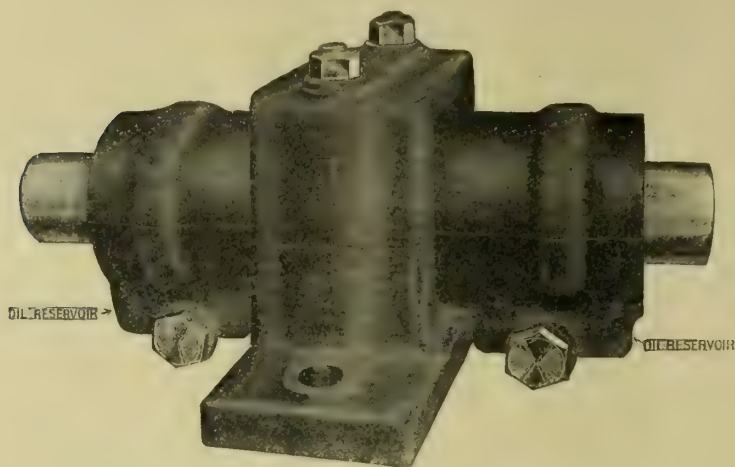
COMPLETE KYNOCH ROLLER BEARING. MESSRS. KYNOCH, LTD., BIRMINGHAM.
